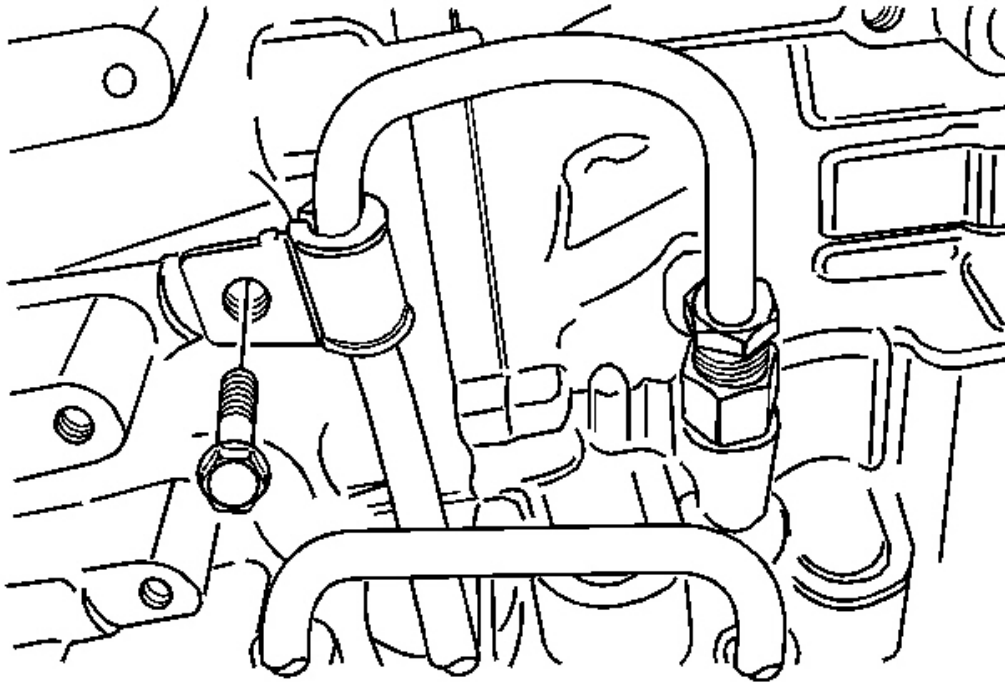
Removing Fluid Cooler Inlet Pipe, Bolt & Transaxle
